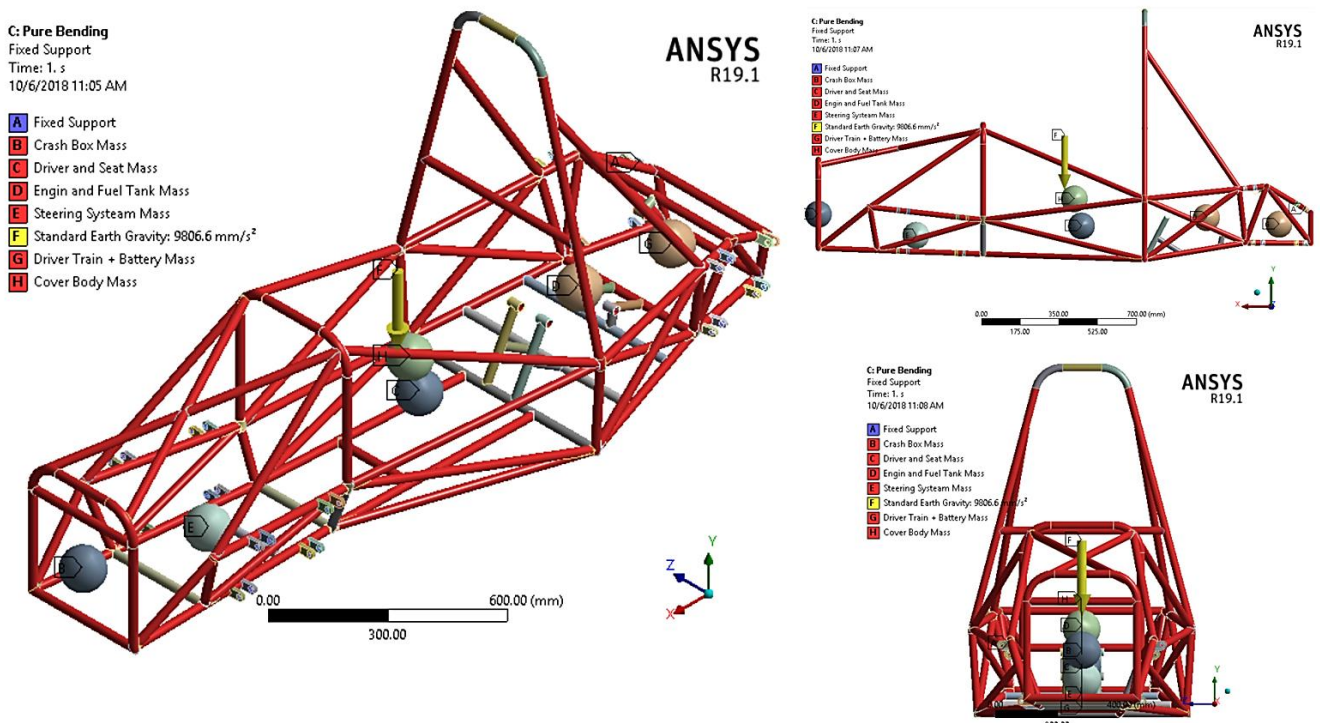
Pure bending load applied on the Formula SAE M1 Chassis (front, side, and isometric view)
